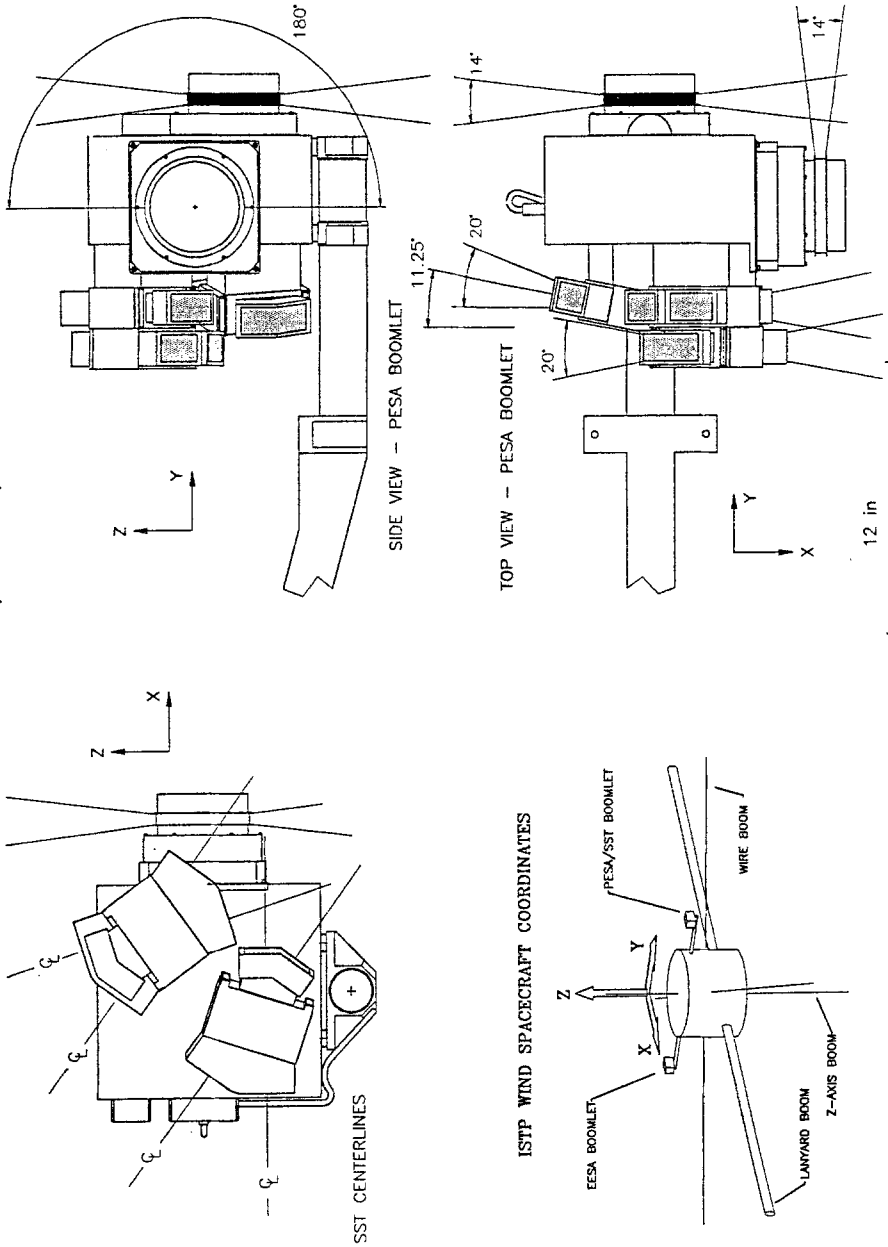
Three views of the PESA/SST boom unit, and a schematic of the boom mounting on the spacecraft (lower left).
